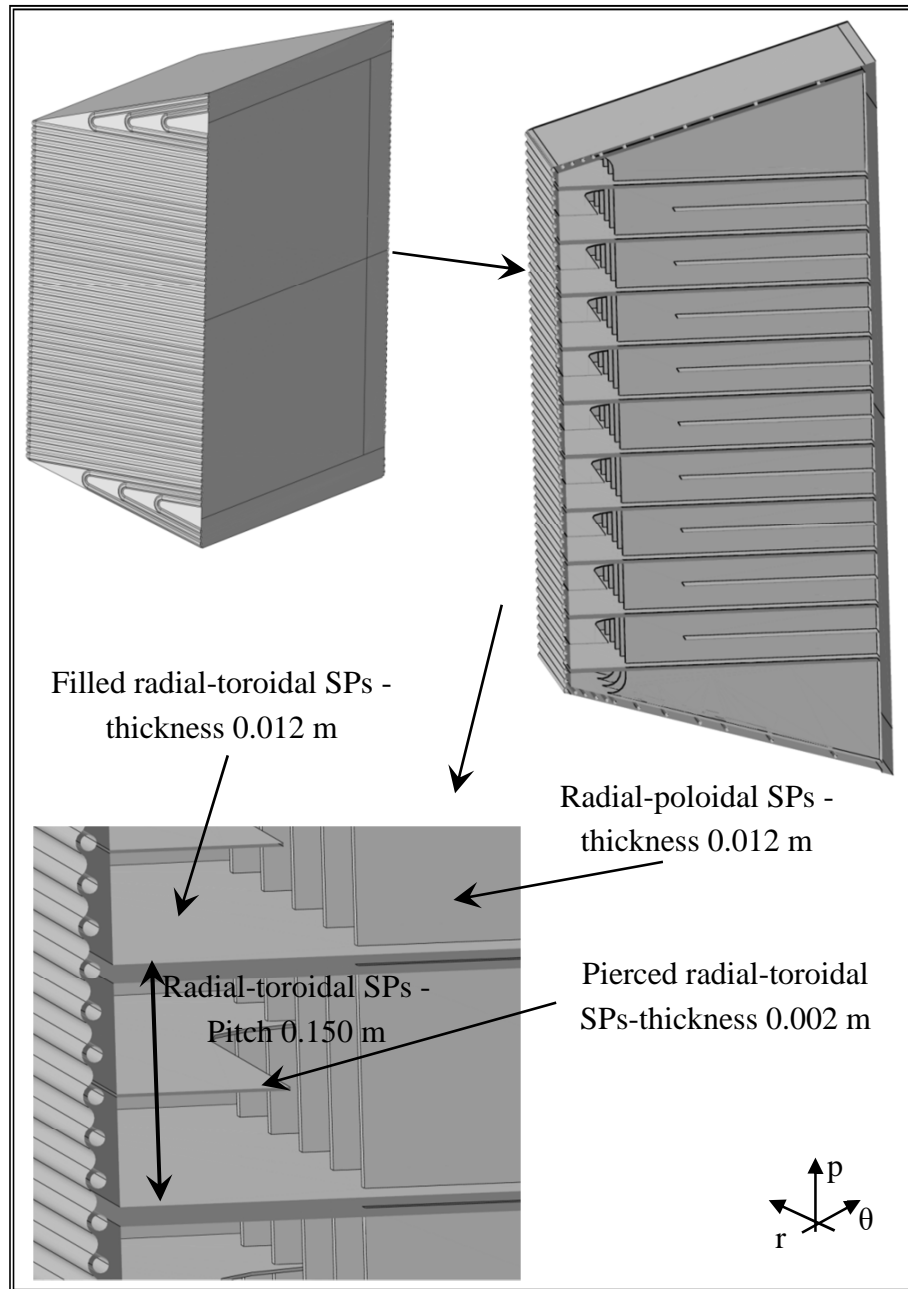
Configuration 8 - 3D geometric model exploded view.
